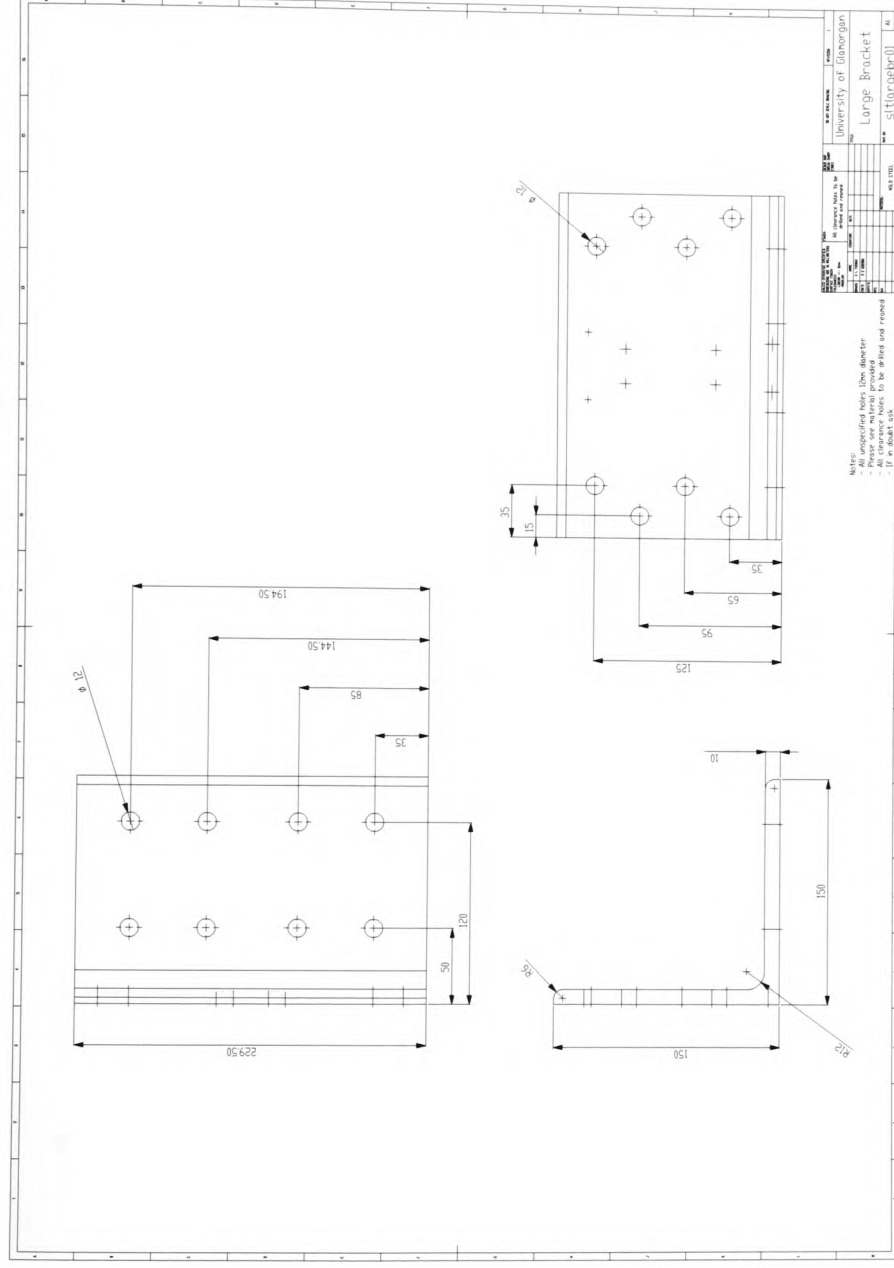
Manufacturing drawing of impact rig specimen back plate
